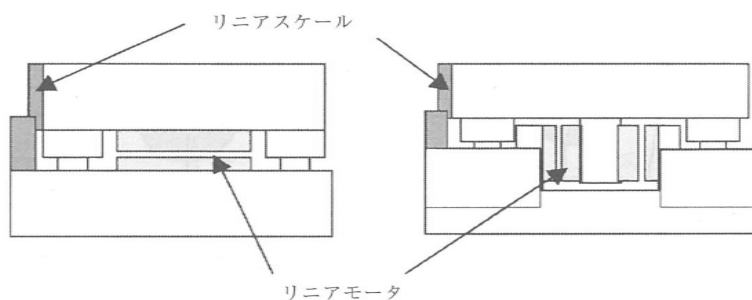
Drive construction of the machine tool ⁽⁶⁻⁹⁾
